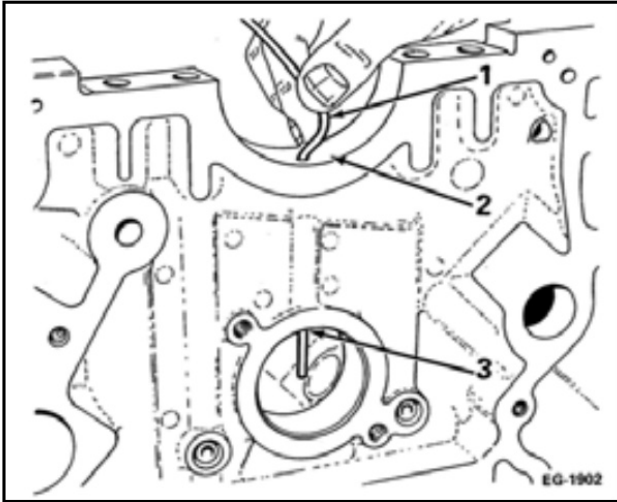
Checking the Camshaft Bushing / Crankcase Oil Hole Alignment
